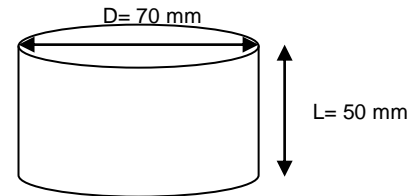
Elastomeric mount in the form of cylinder type and their dimensions
